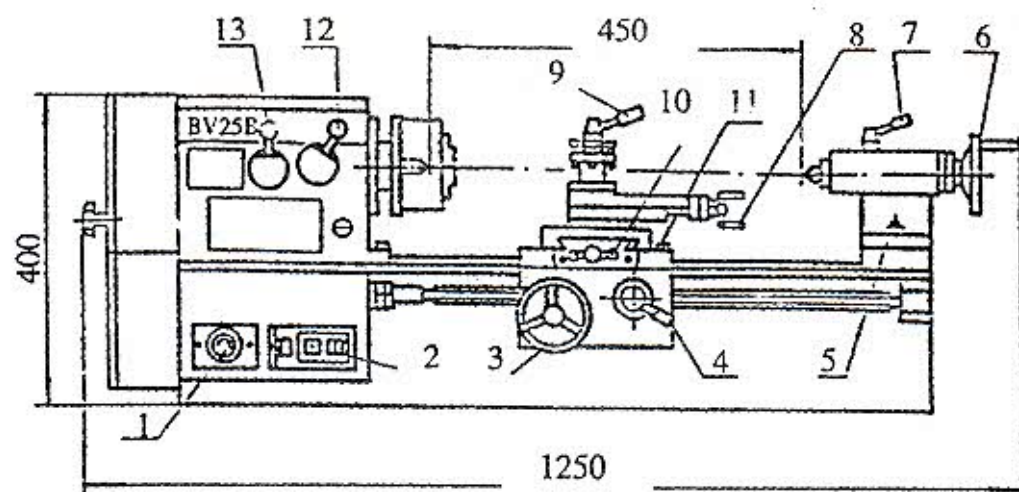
1 OUTLINE DRAWING OF BV25B - 1 BENCH CUTTING MACHINE
